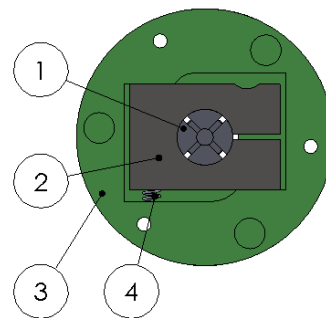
Design of new stopper assembly, with motor shaft (1), stopper (2), block (3) and spring (4)
